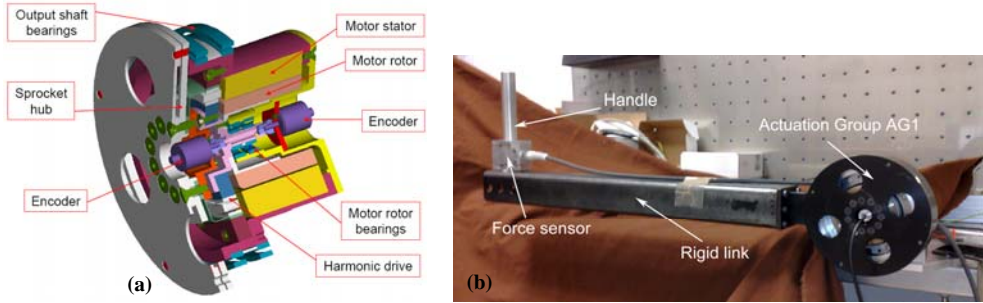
Actuation Group 1 (AG1): (a) CAD section exploded view with indication of the principal elements; (b) Manufactured prototype in its test-rig.
